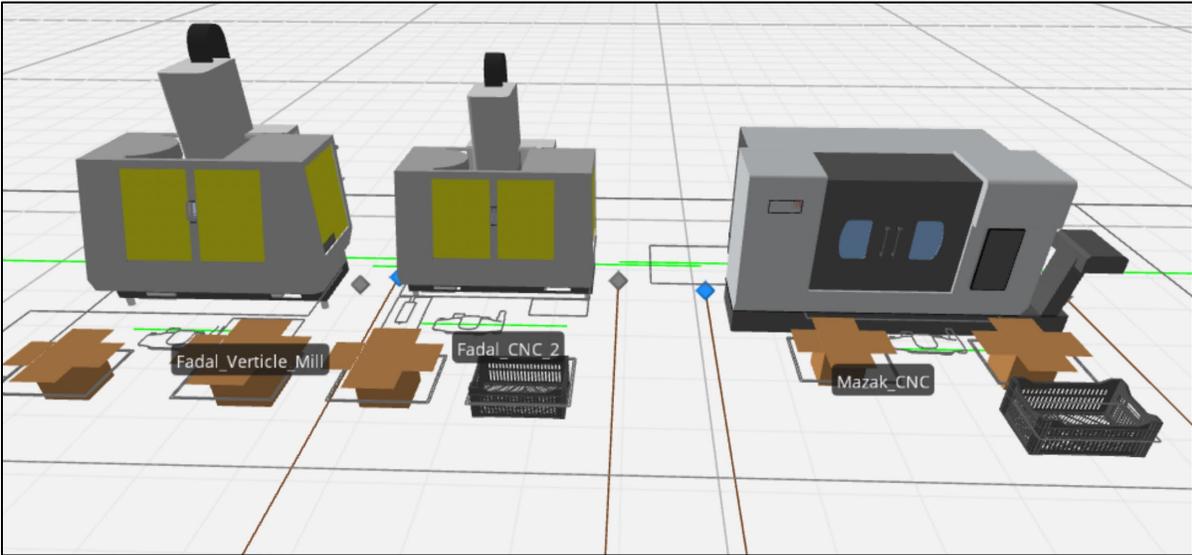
Ferndale Current Steel Bracket Arm Machining 3D View Simio Model
